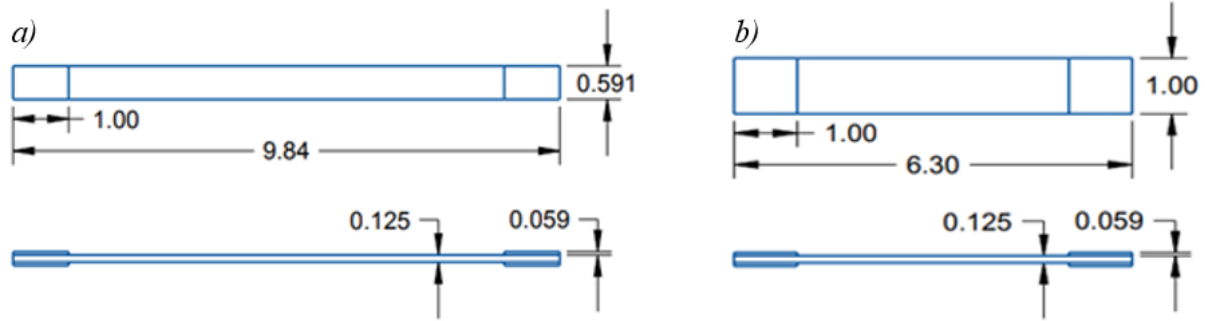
a) 0° tensile specimen geometry and b) 90° tensile specimen geometry
